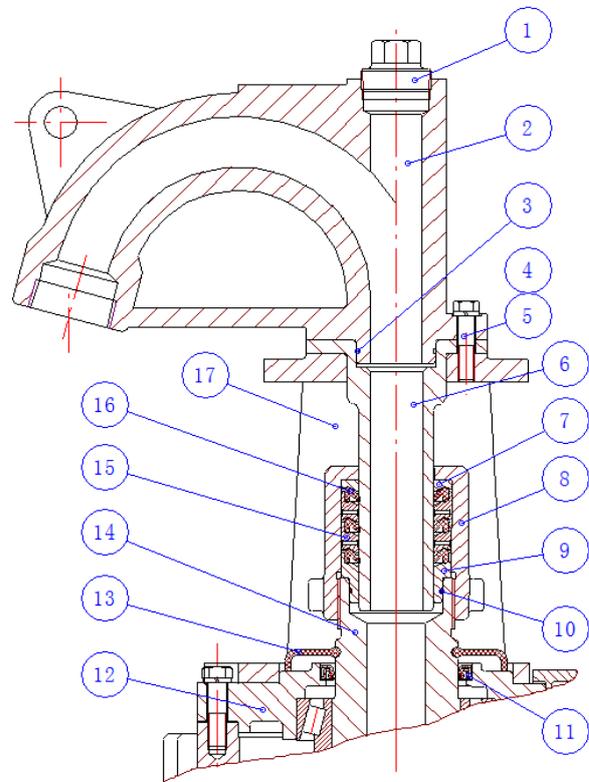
Wash pipe Packing Assembly of DSL85 Power Swivel
